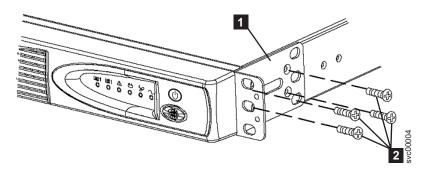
Installing the support rails for a 2145-1U uninterruptible power supply into the rack
